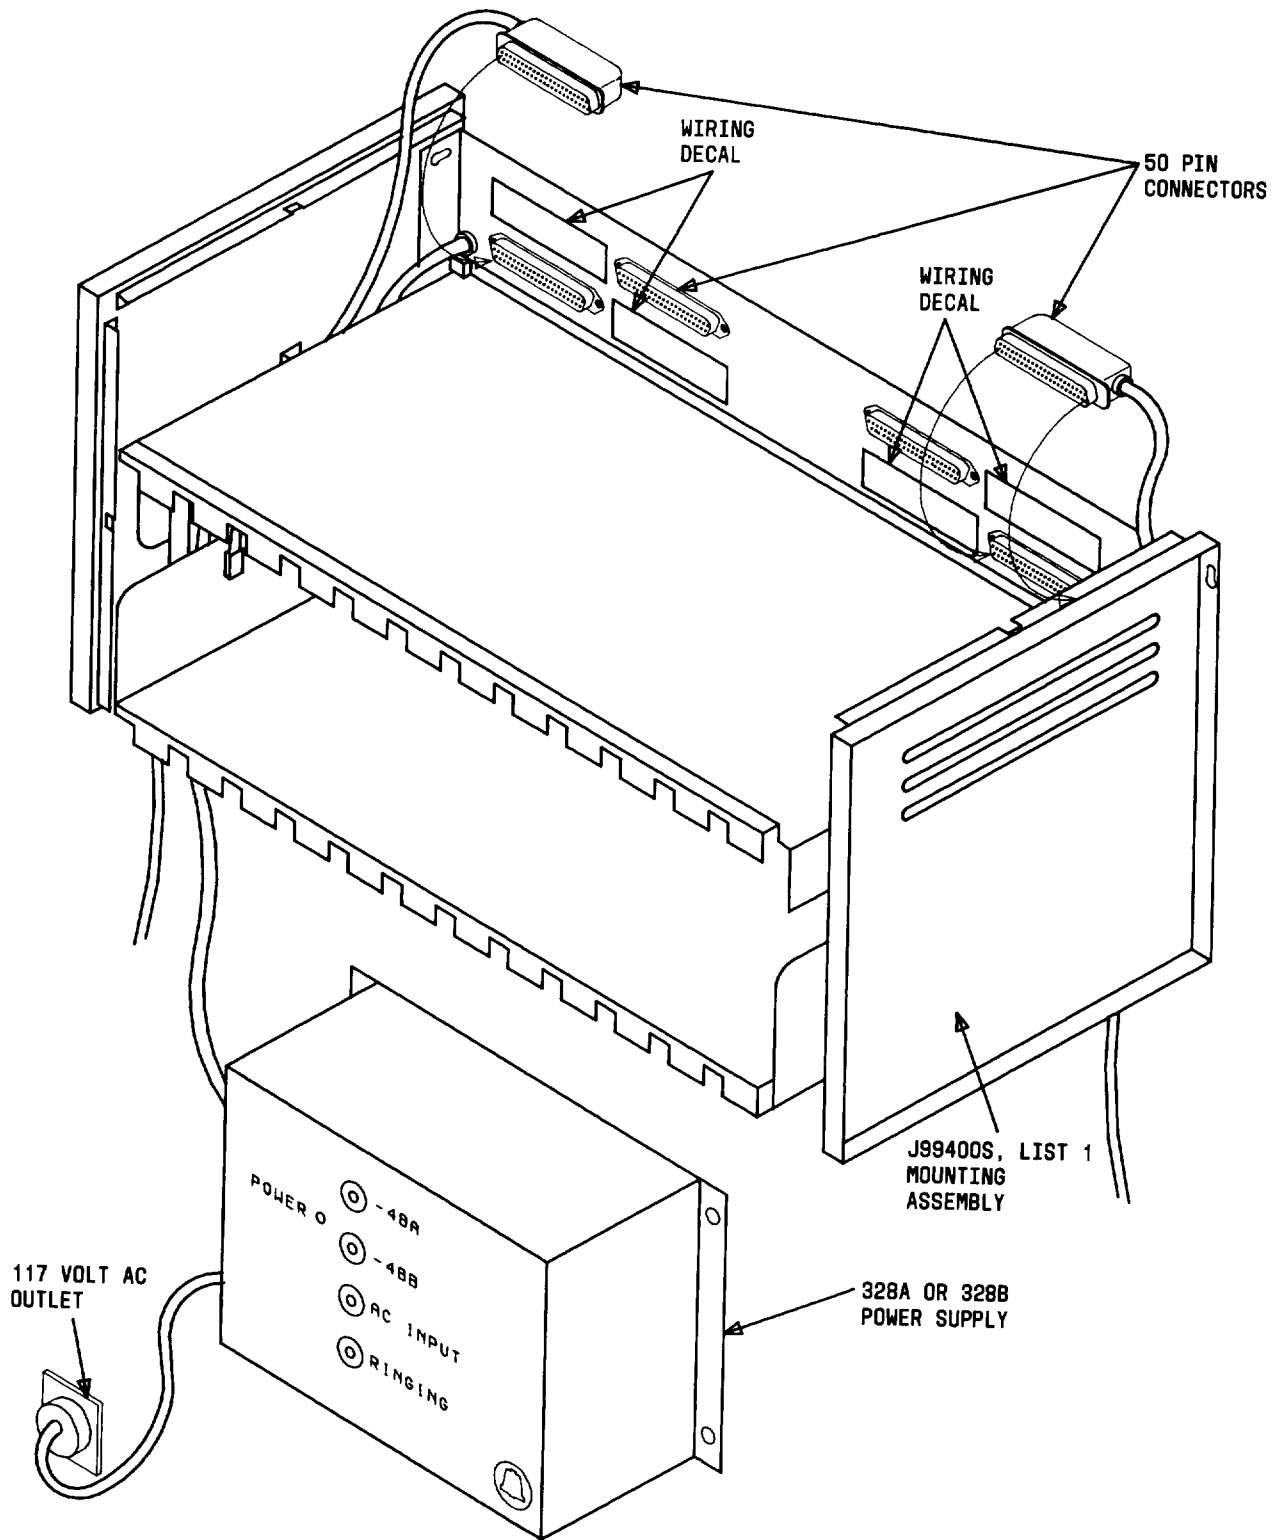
J99400S Housing Assembly—Single-Module Arrangement for 12 MFT Circuits
